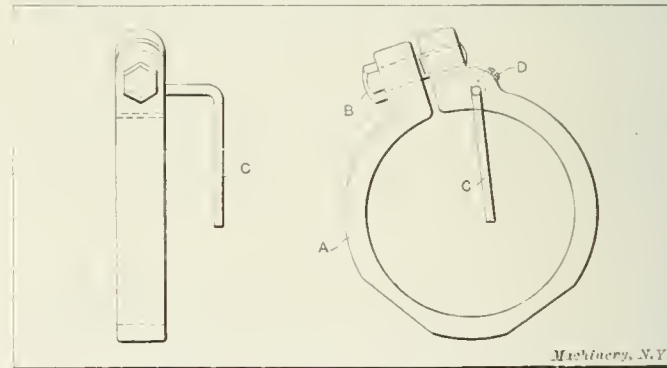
Ejector used in Connection with the Shaving-tool Holder shown in Fig. 26
